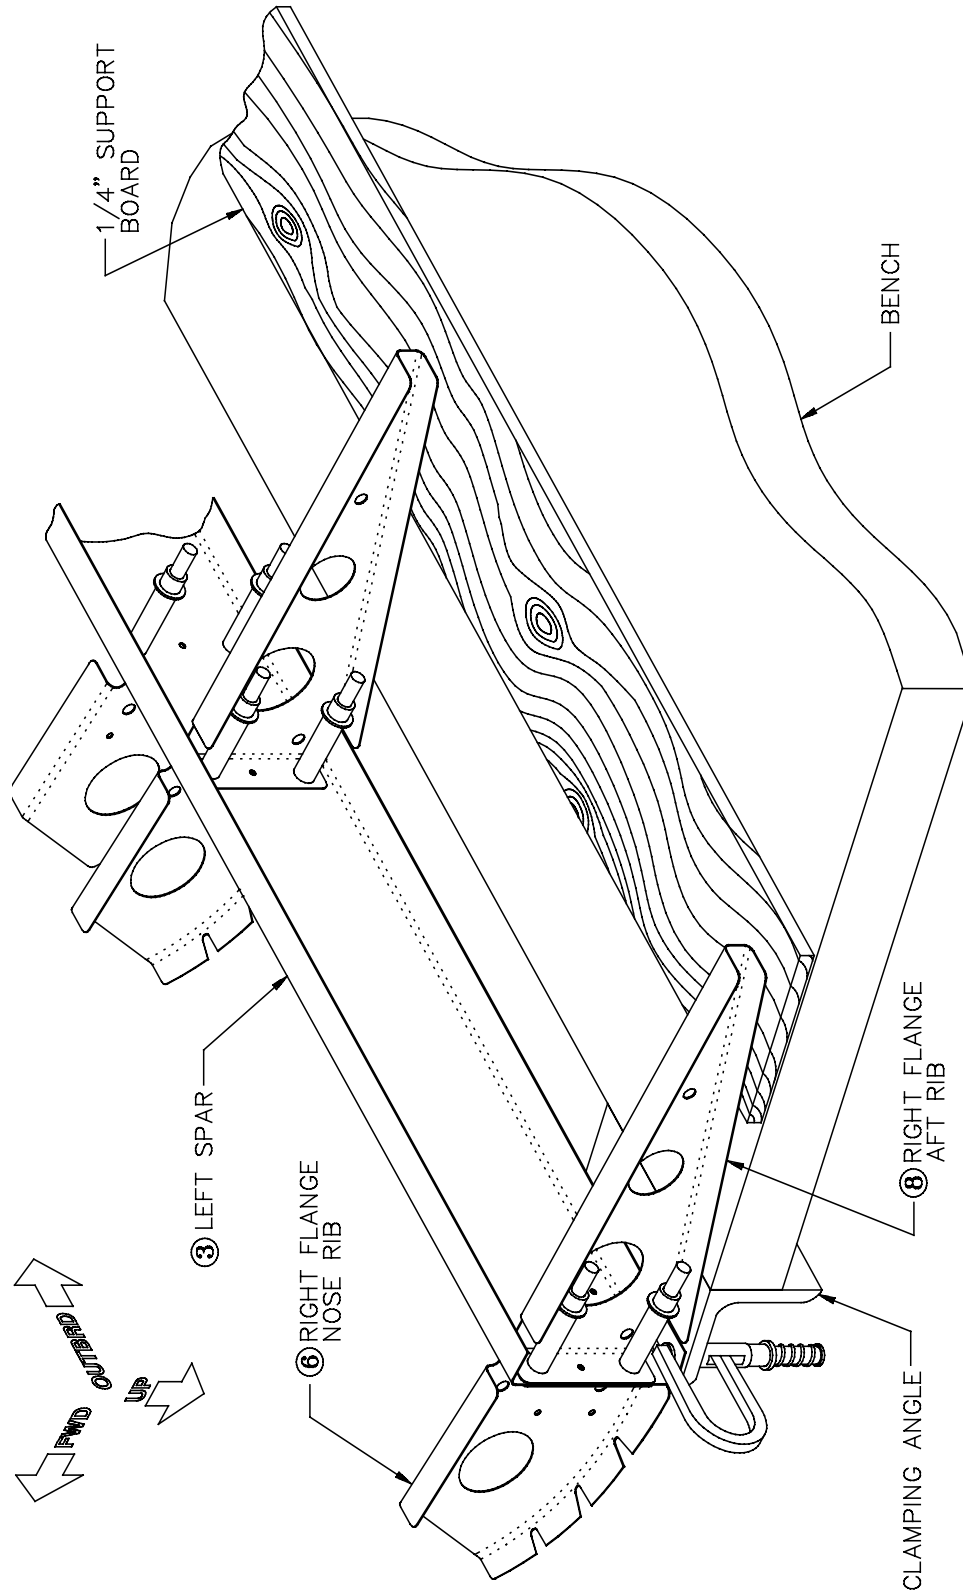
Clamping the Spar/Rib Assembly to the Bench
